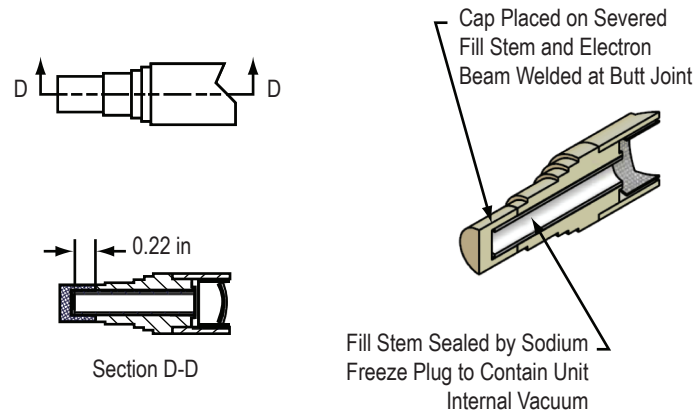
Cutoff and plug seal weld option for heat pipe fill stem closeout.
